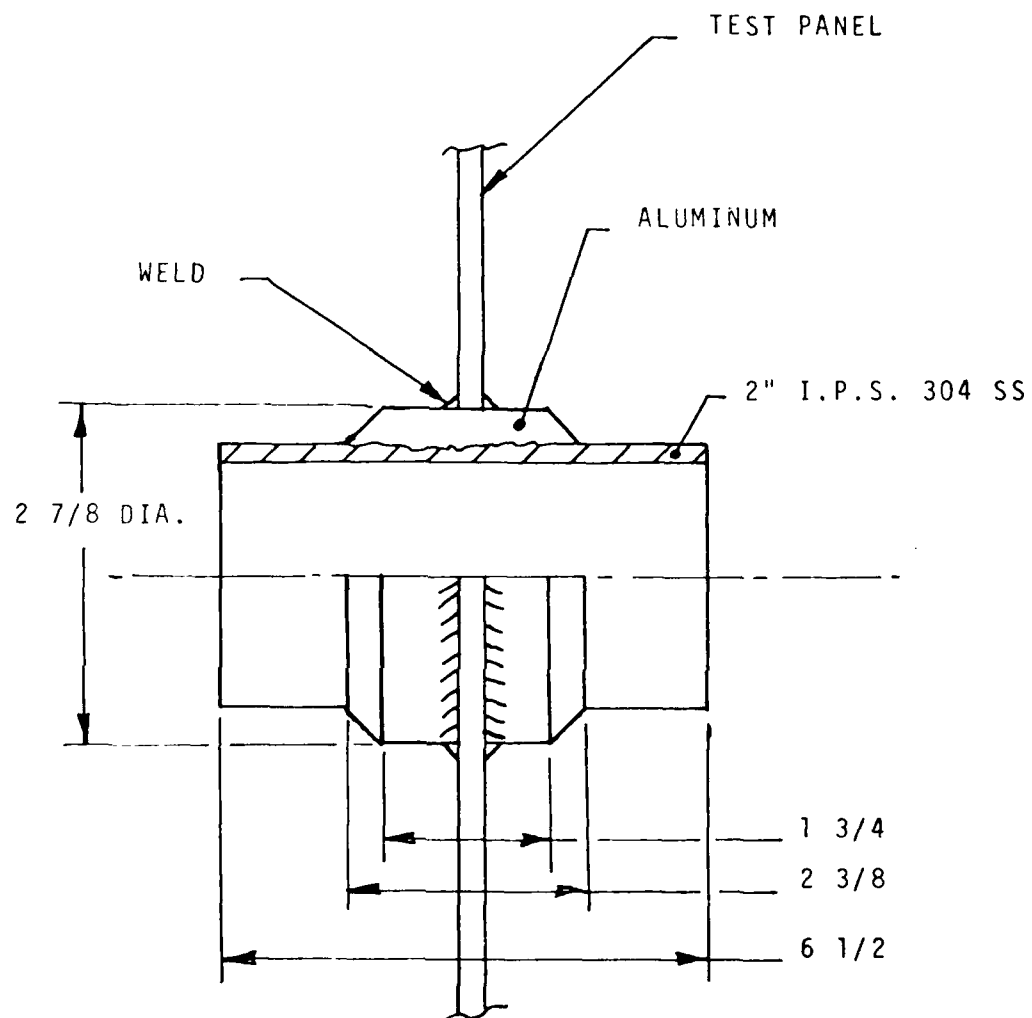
EXPLOSIVE BONDED SLEEVE PENETRATION CONFIGURATION
